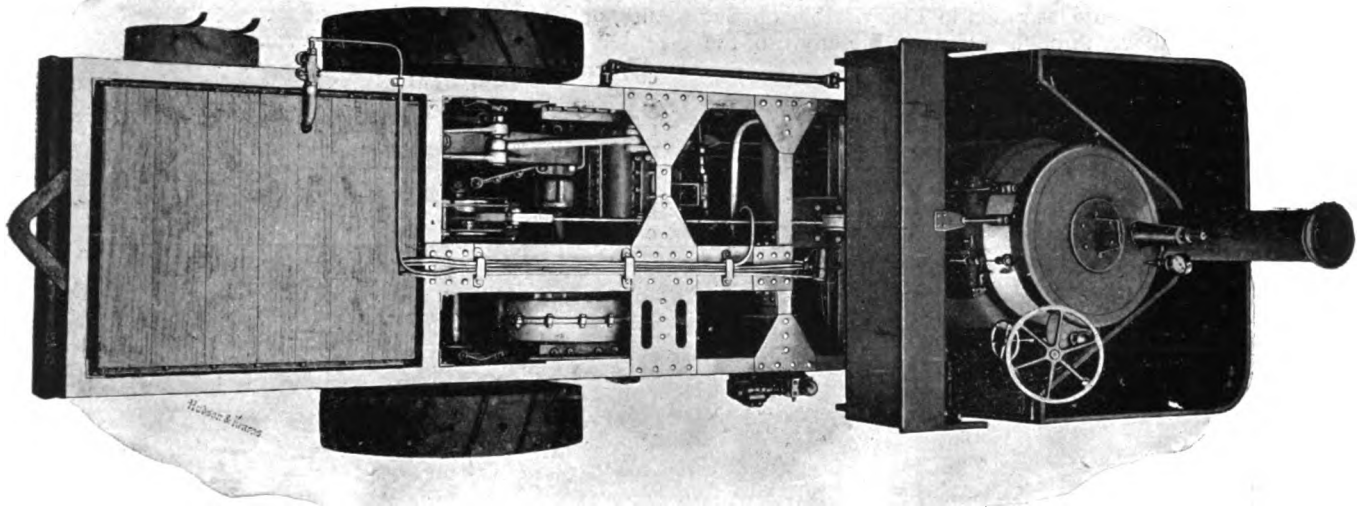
View, from above, of the 5-ton Thornycroft Colonial Steam Wagon, which has a water-tube boiler, a 45-h.p. engine, turn-table steering, and enclosed transmission gear.
